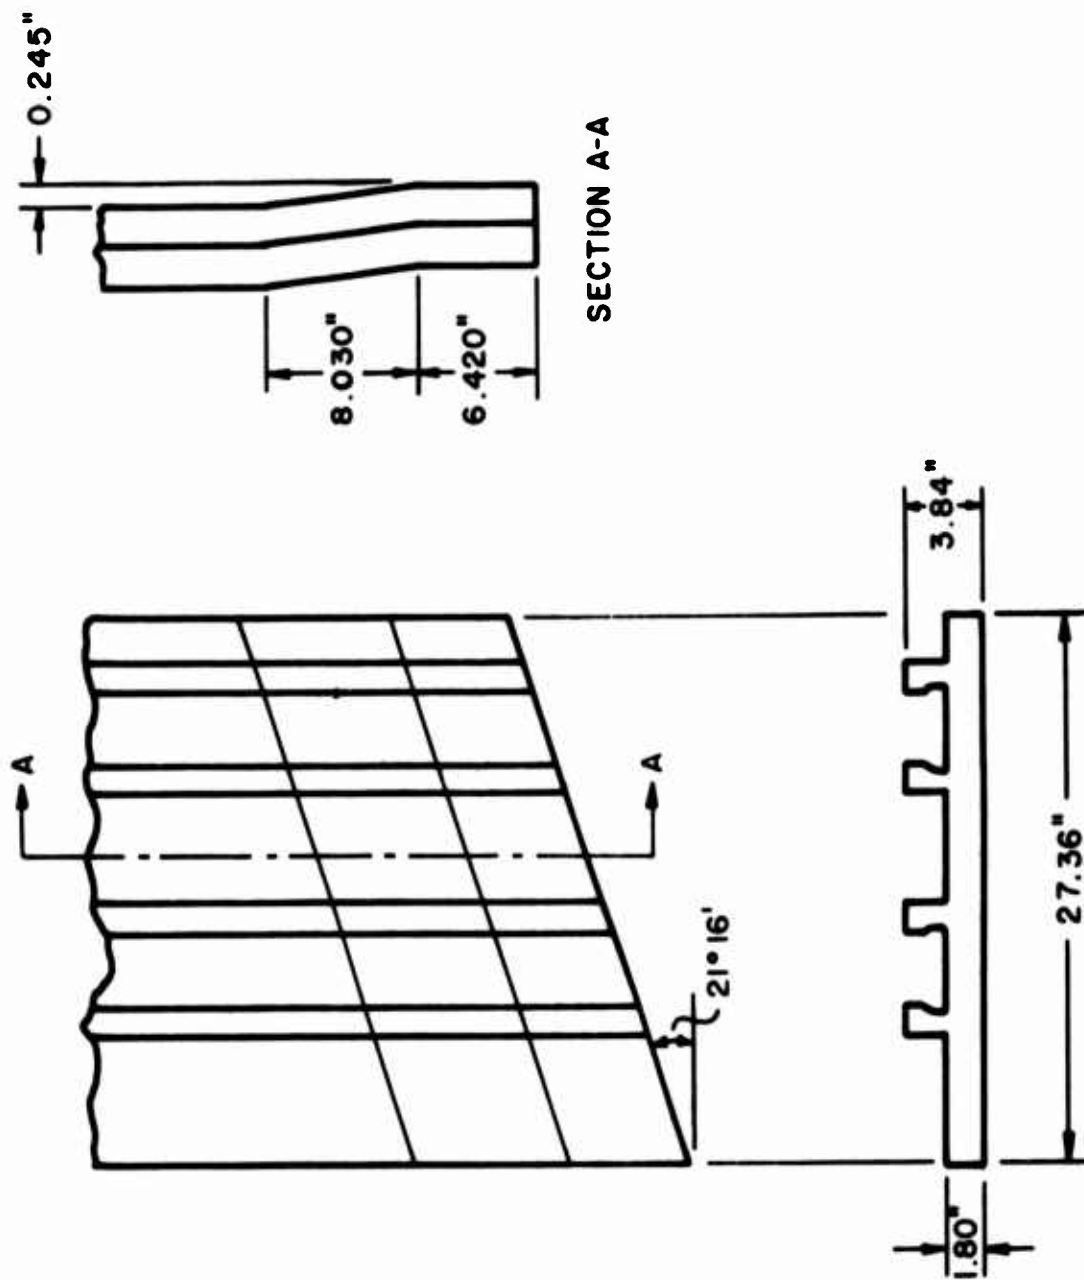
ILLUSTRATES DETAILS OF JOGGLED END OF EXTRUSION FOR C5A.
